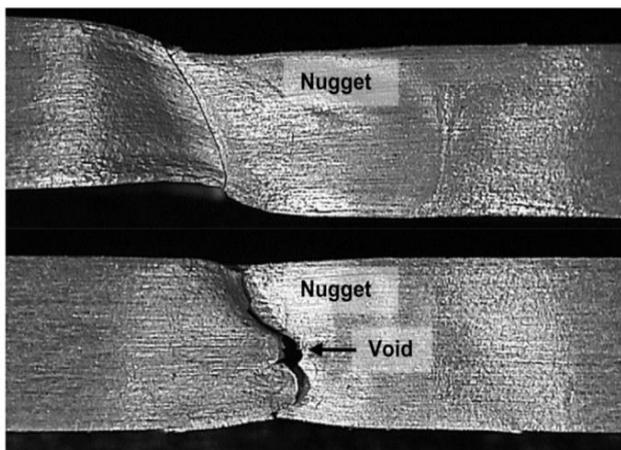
Friction Stir Welding with Running void in AA6061-T6 – Tensile Test(S.Kahl, 2010)
